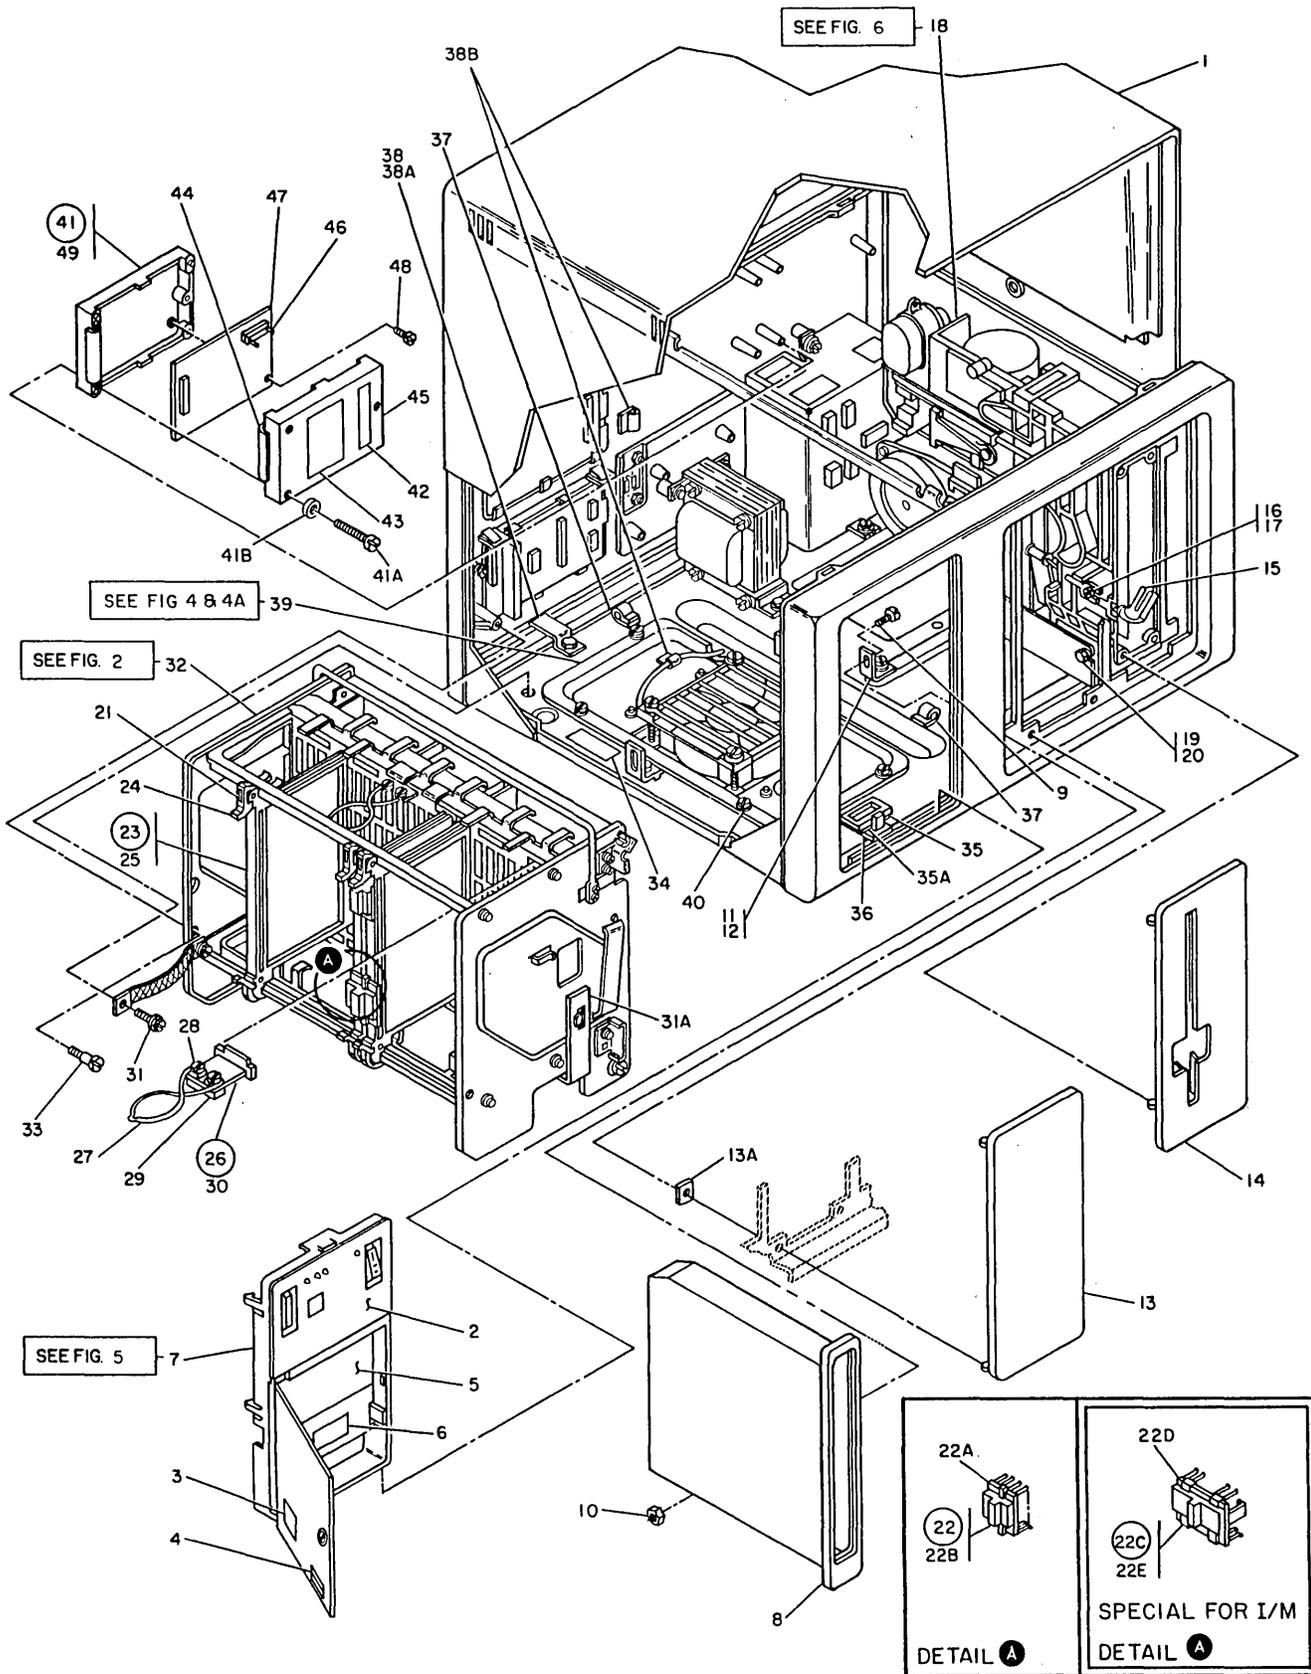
FINAL ASSEMBLY 3274 (SHEET 1 OF 2, INDEX NOS. 1-49)
